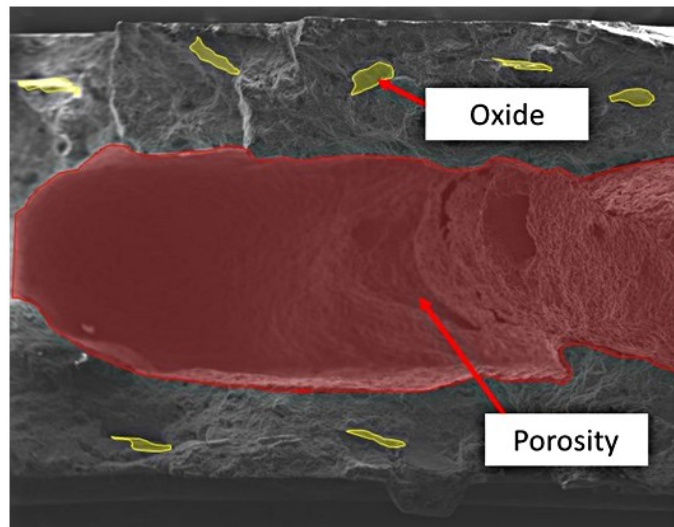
Example of fractographic image with highlighted defects – porosity and oxides
